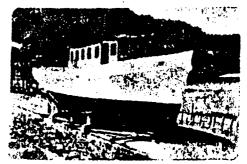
, 22 m Prestressed fibrous ferrocement tugs for coastal log hauling and general cargo handling constructed in Sabah, Malaysia.
